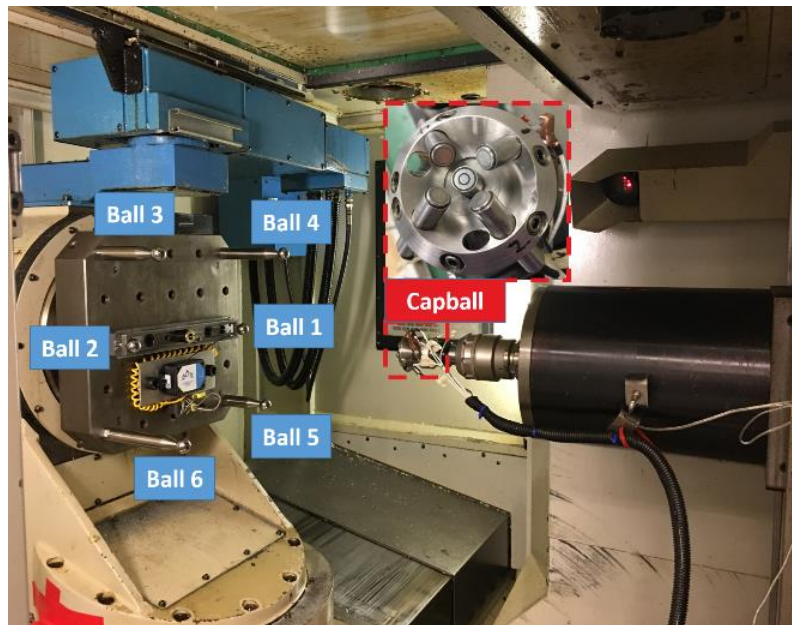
Scale and master balls artefact (SAMBA) ready for collecting data by the Capball on a wCBXfZY(S)t machine; shown for  $b = 0^\circ$ ,  $c = 0^\circ$
